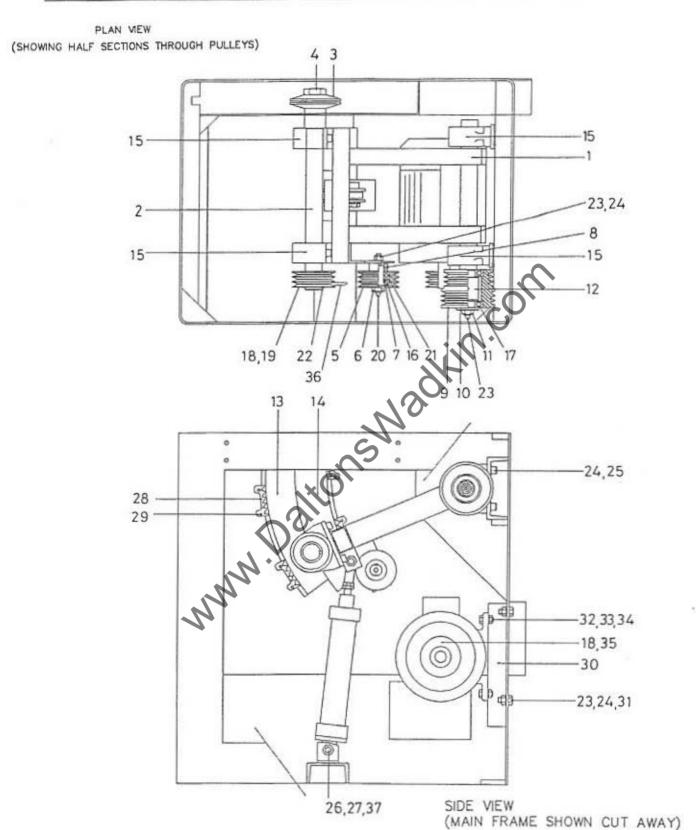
DRIVE AND SPINDLE ASSEMBLY
